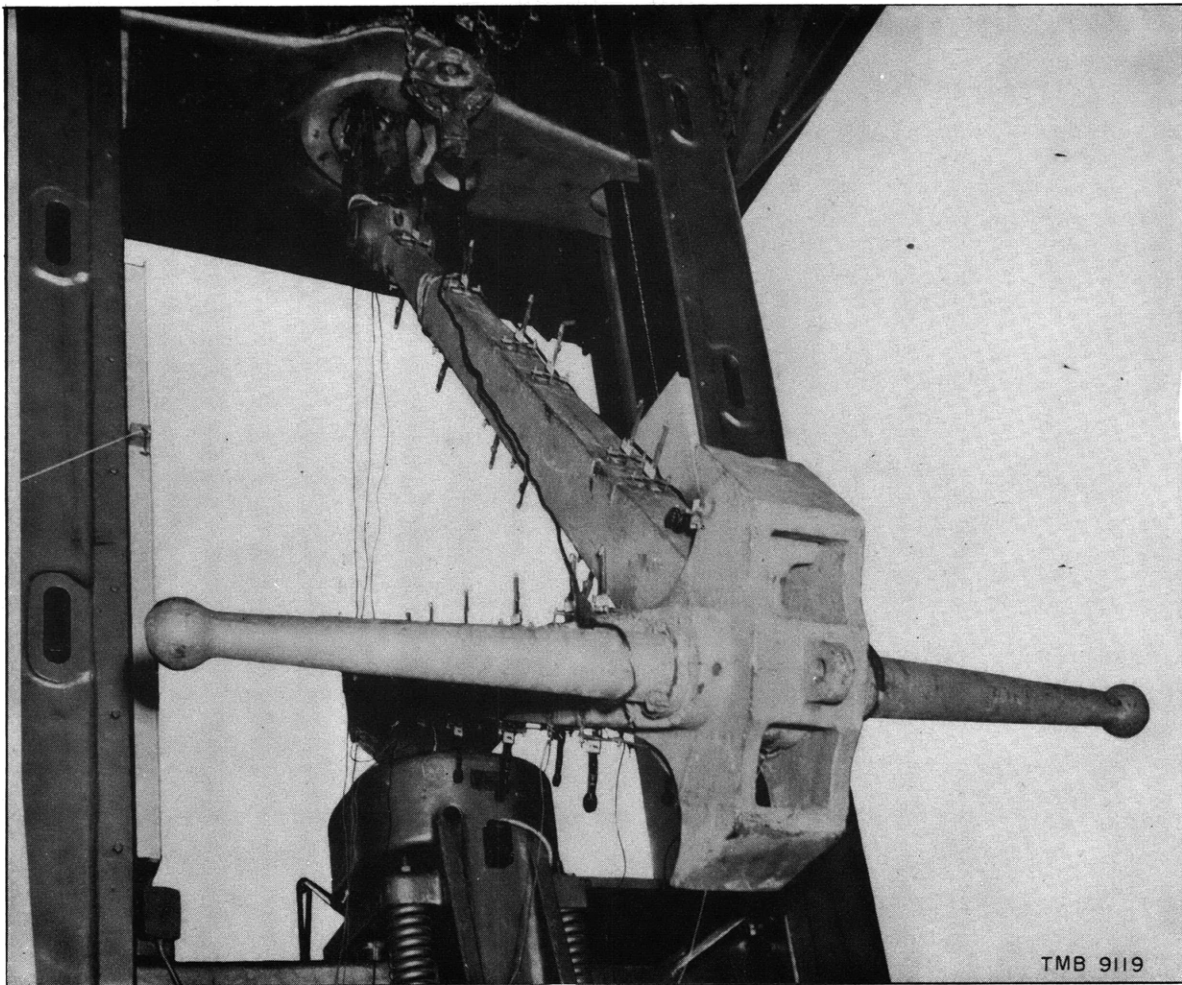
Oblique View of Anchor Mounted for Tensile Loading Test
